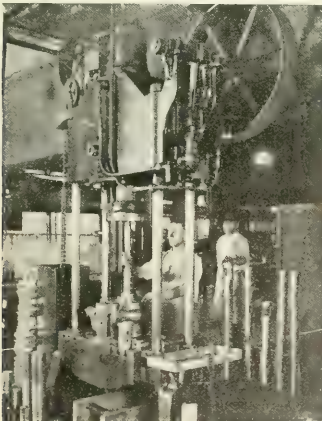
BROACHING THE BEARING TO FINAL SIZE IN A HYDRAULIC PRESS
